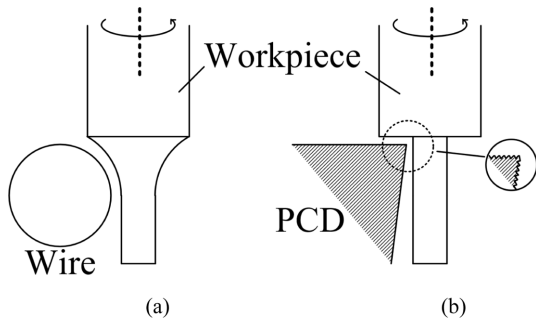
Schematic diagram of (a) Wire electro-discharge grinding (WEDG) and (b) PCD mechanical machining for micro circular pin
